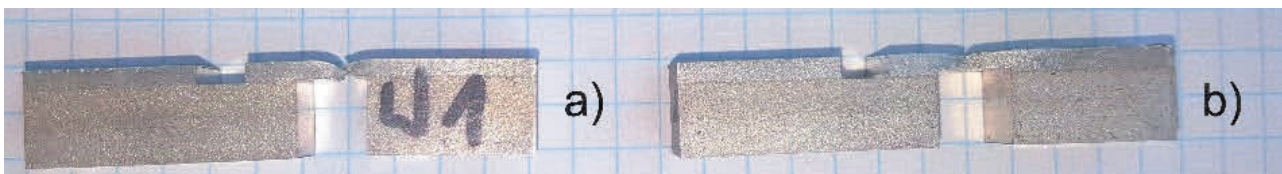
The shape of Mg/Al bimetallic specimens after bond strength testing:
